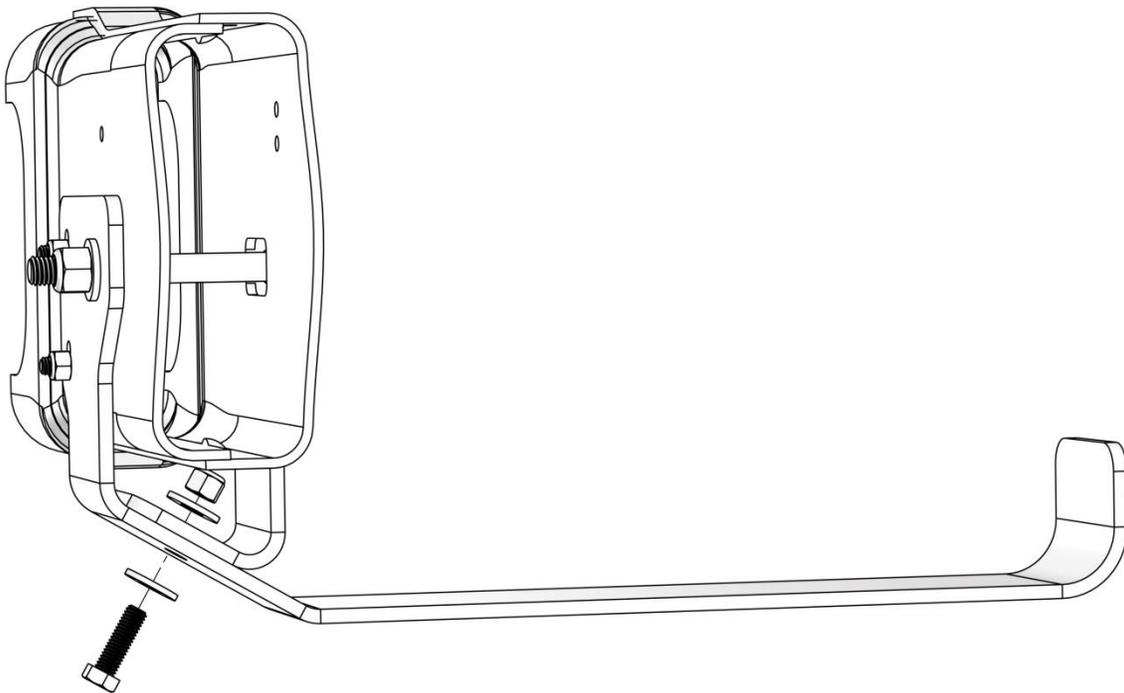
First, line up the Inner Piece of the Front Support with the existing rectangular hole on the inside of the truck frame as shown above.
